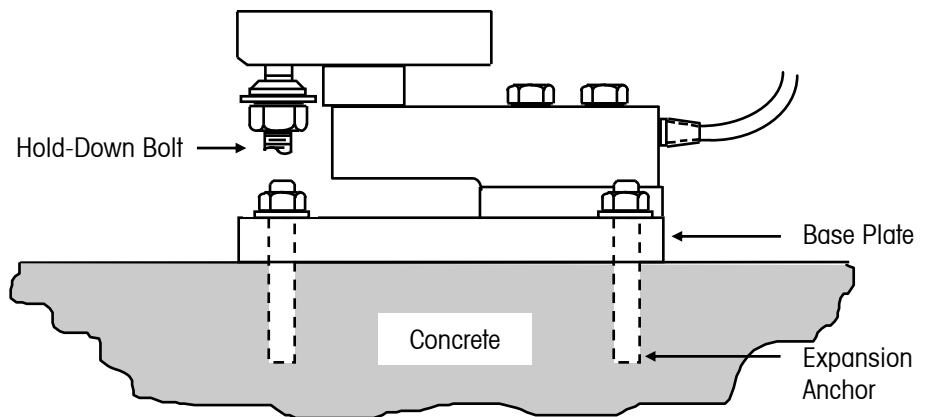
Base Plate Bolted to Level Concrete Floor
